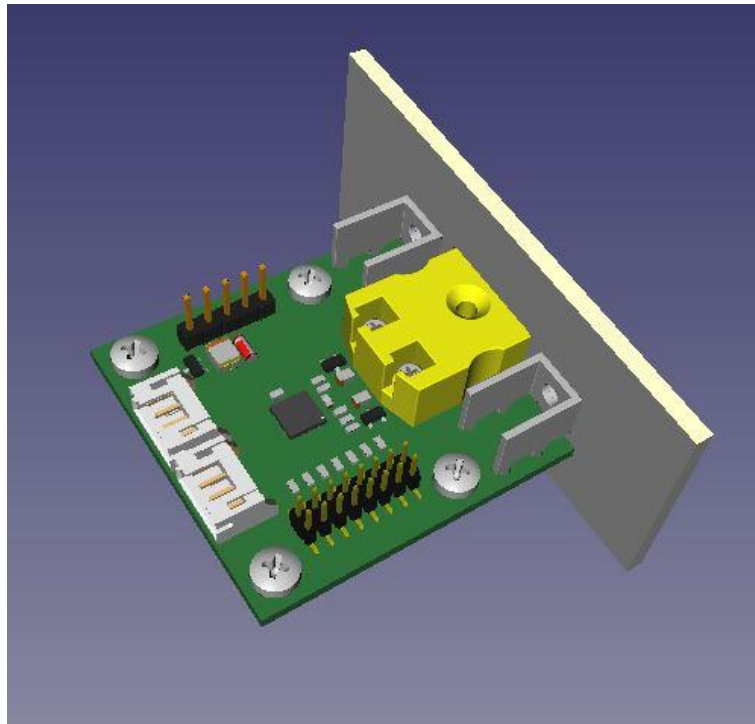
The PCB mounts to the base; the connector attaches to the panel.
